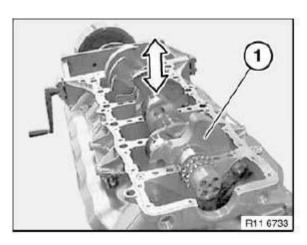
Removing Crankshaft Courtesy of BMW OF NORTH AMERICA, INC.
